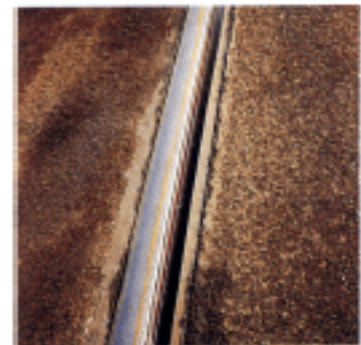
A resurfaced rail using build-up welding with the special Ah automatic machine. After welding with OK Tubrodur 15.65/OK Flux 10.52 ground to the final contour
